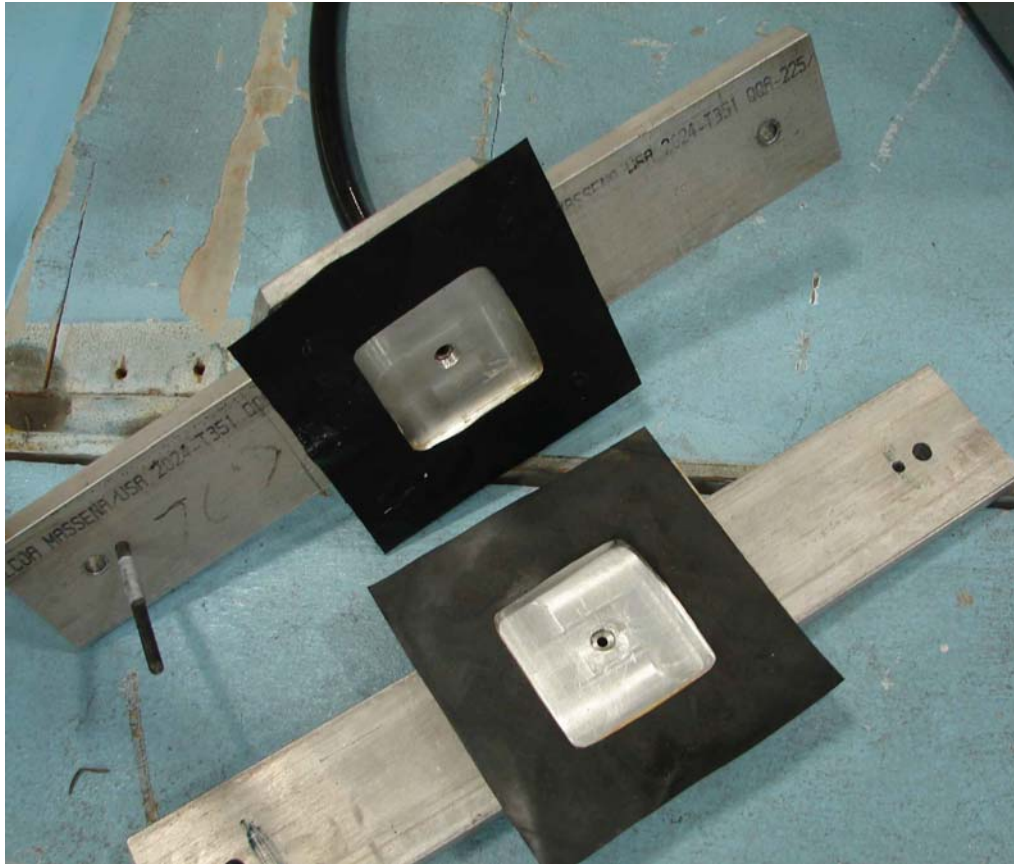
Open pressurization fixture showing rubber gasket and cavity
